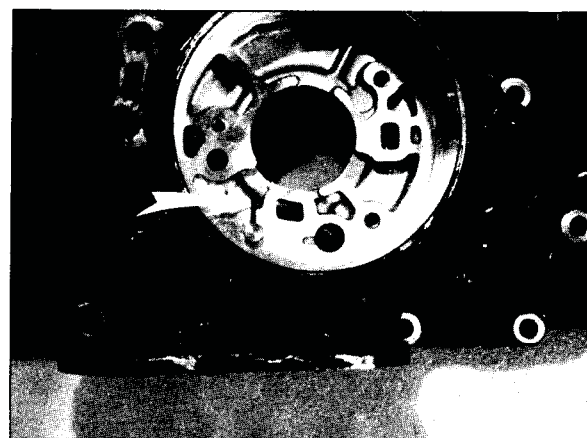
B Have retaining pin face up (12 O'clock position, when installing pulley(fig.107). Pump side of housing.
